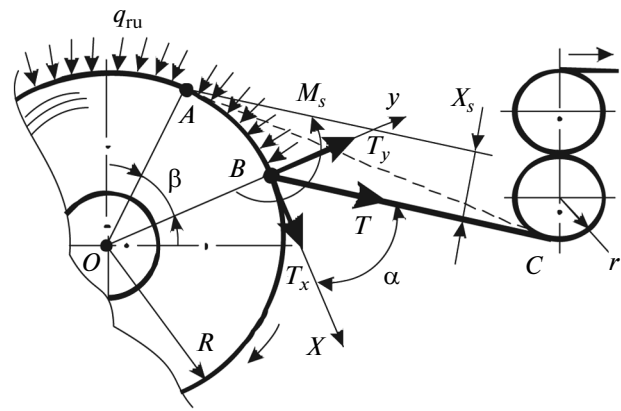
Separation of a welded upper layer from the coil in unwinding: q_{ru} is the force required for separation of the welded surfaces of adjacent turns in the coil.
